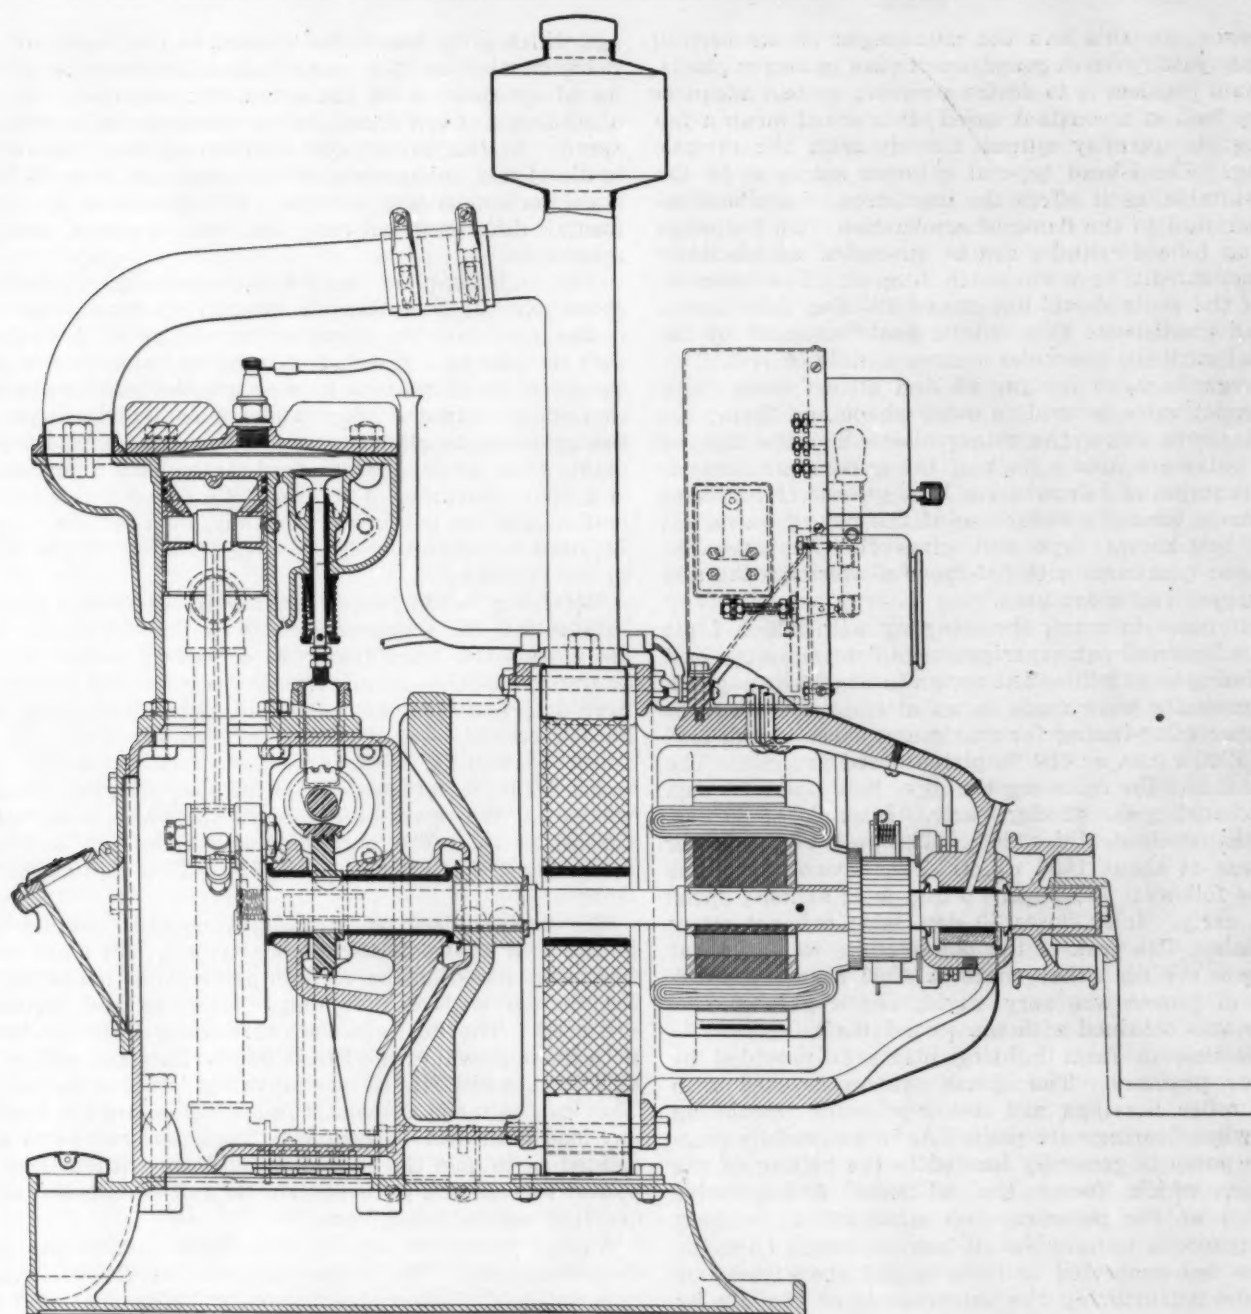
SECTIONAL ELEVATION OF THE PLANT ILLUSTRATED IN FIG. 13
